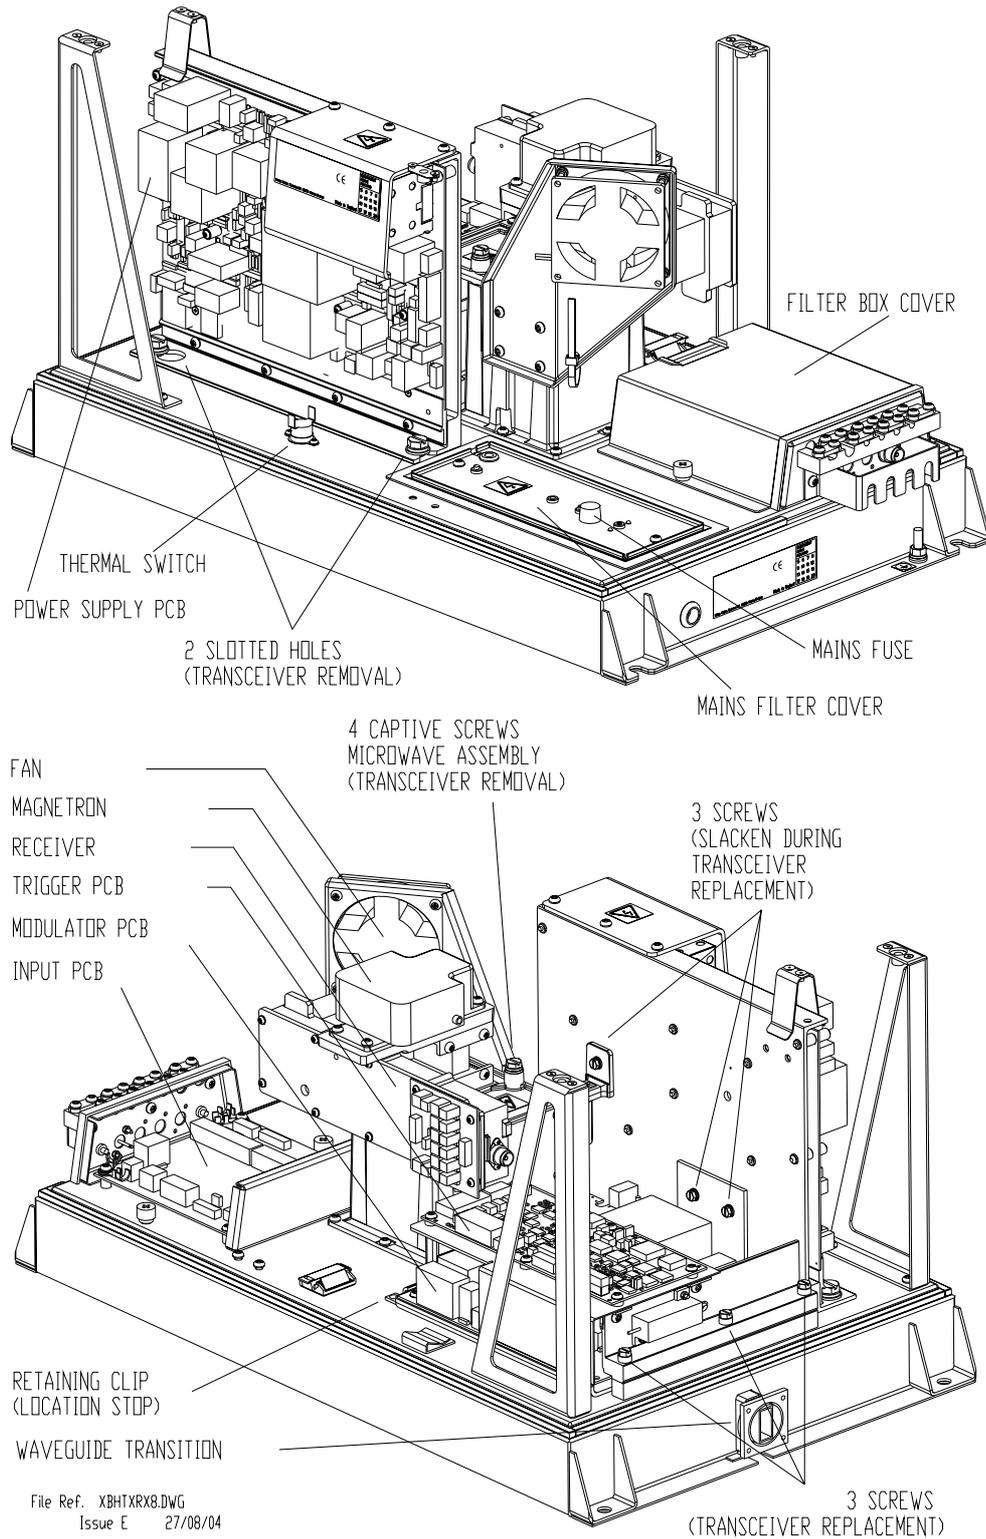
Bulkhead Transceiver – View with Cover Removed (earlier version)
